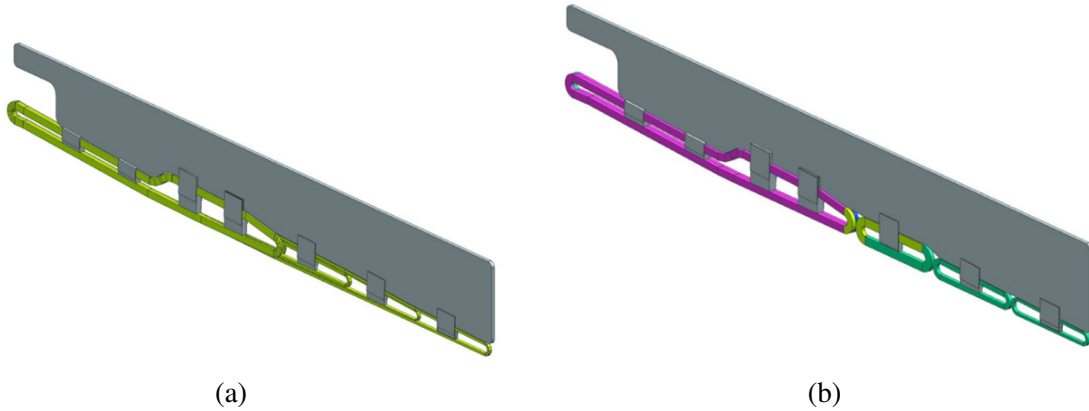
Strongback concept for the (a) “hybrid” and (b) “segmented” version of a single downstream toroid coil. The segmented coils would be assembled into coil packs similar to the hybrid coils.
